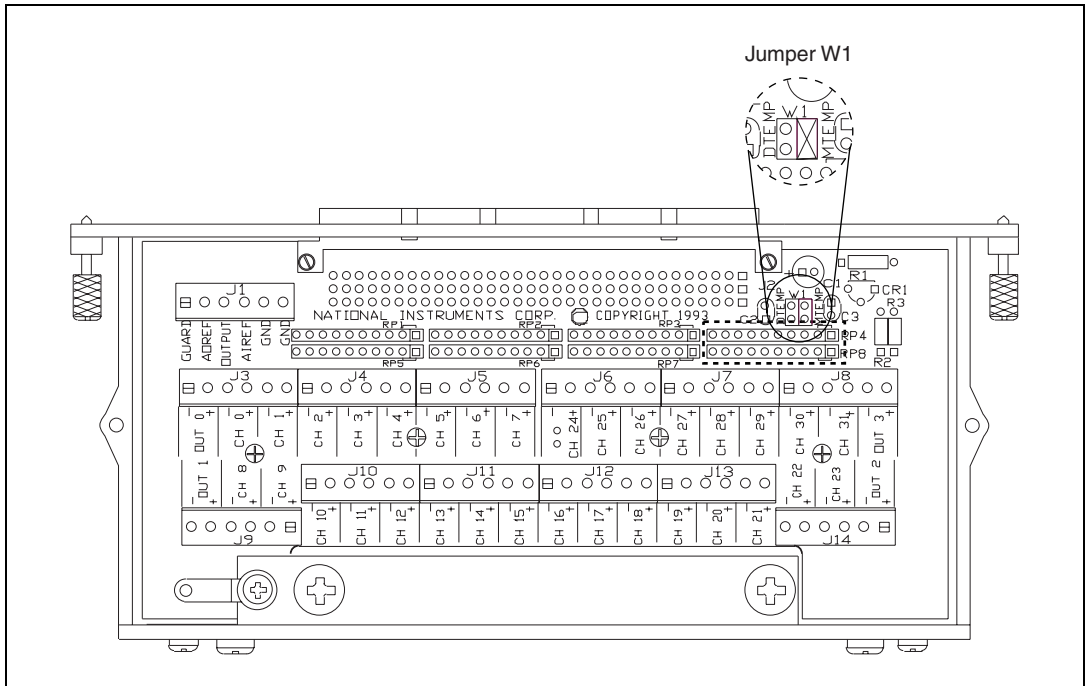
Location of Jumper W1 on the SCXI-1303 Terminal Block
